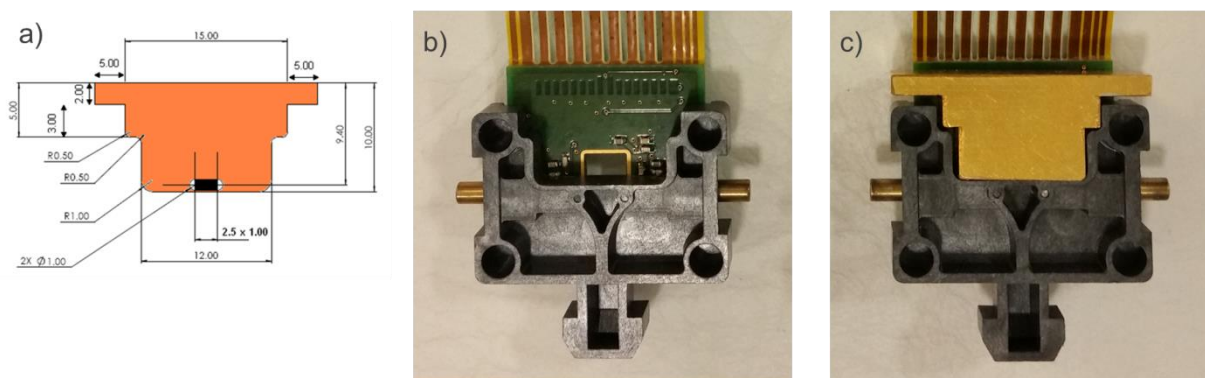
Custom heatsink: a) heatsink design, b) optical head section prior to heatsink attachment, c) optical head section with heatsink attached
